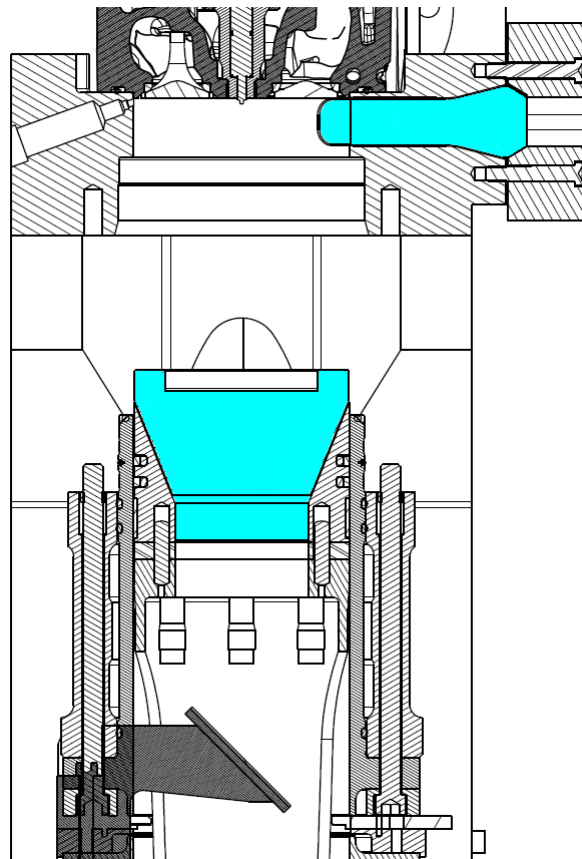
Large bore dual fuel engine: cylinder cross-section.
